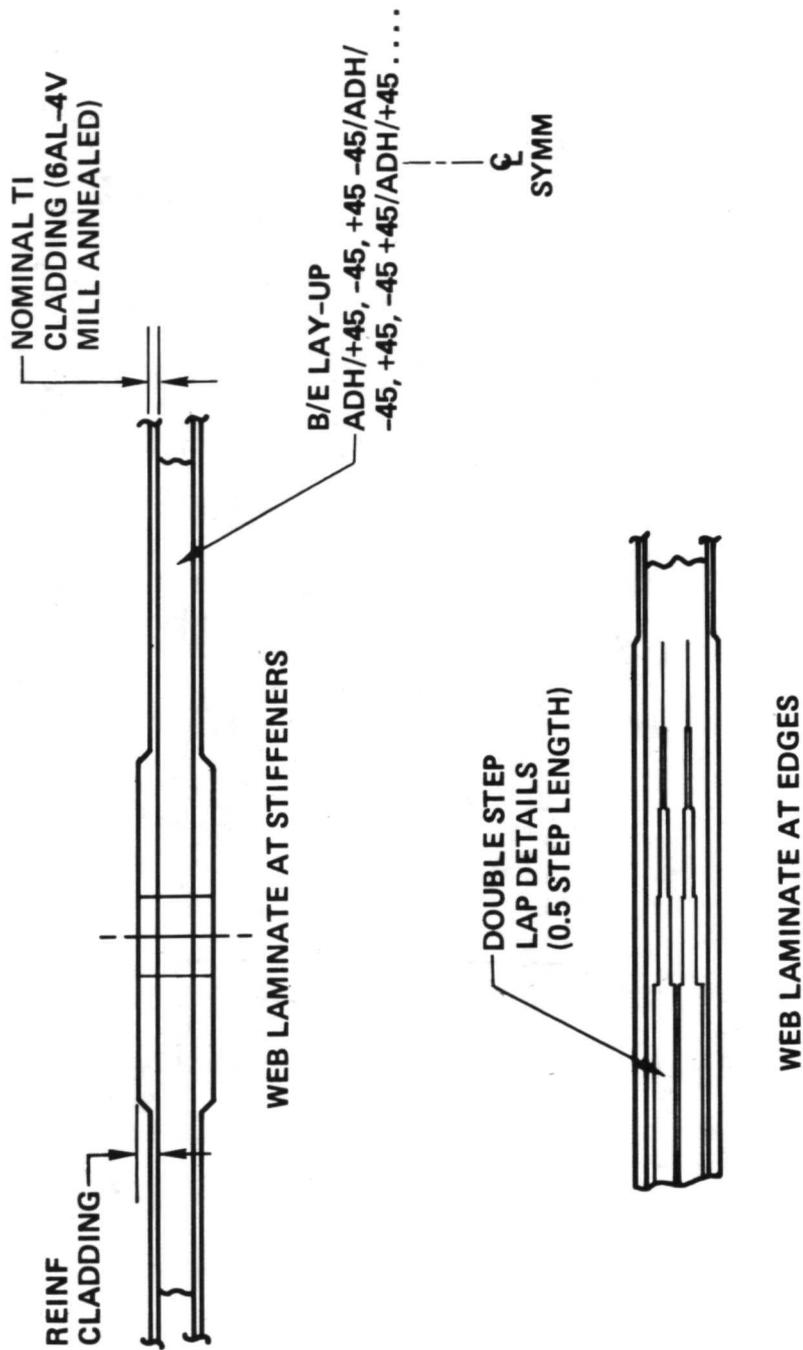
B/E REINFORCED SHEAR WEB DESIGN DETAILS
